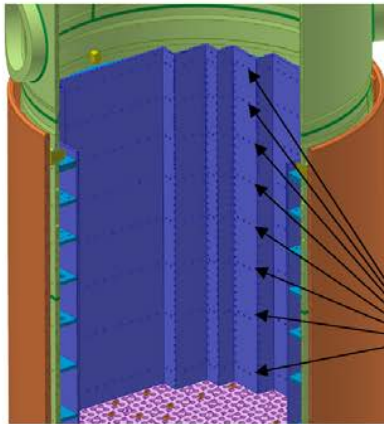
IP2-CID-0060 Baffle-former Assembly – Baffle-edge Bolts
